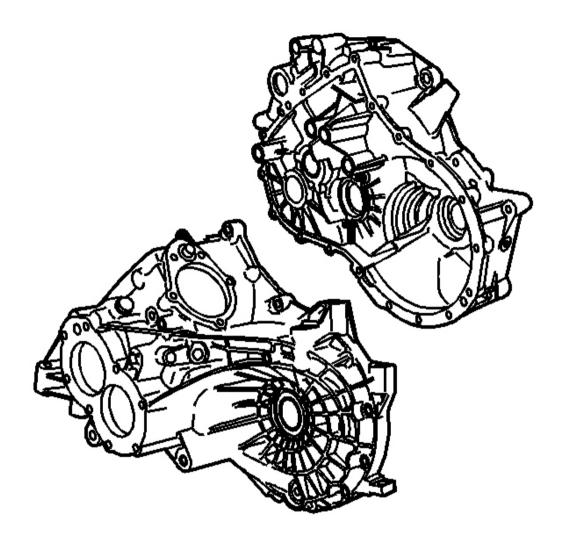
View Of Clutch & Differential Housing Courtesy of GENERAL MOTORS CORP.
